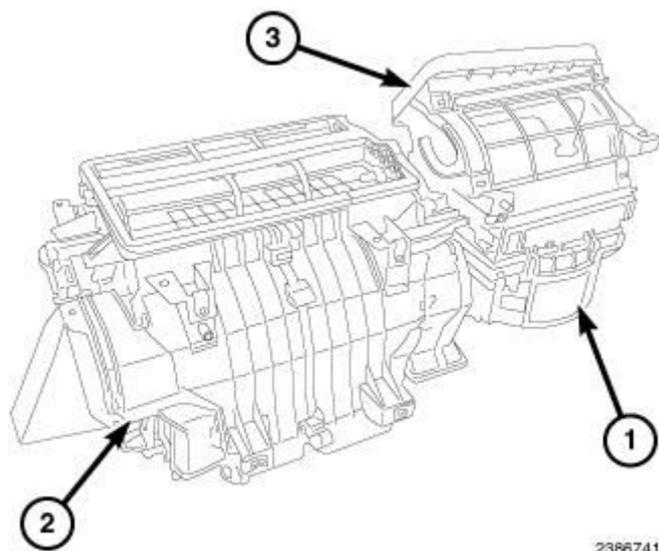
HVAC Housing, Air Inlet Housing & Air Distribution Housing
